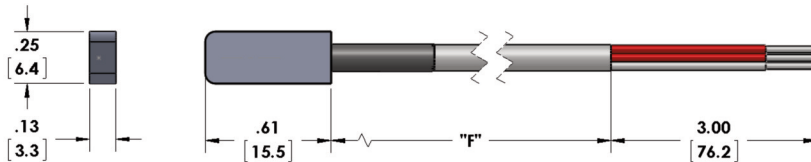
Dimensions of an R342 RTD. Dimensions are in [mm], unless specified otherwise.
